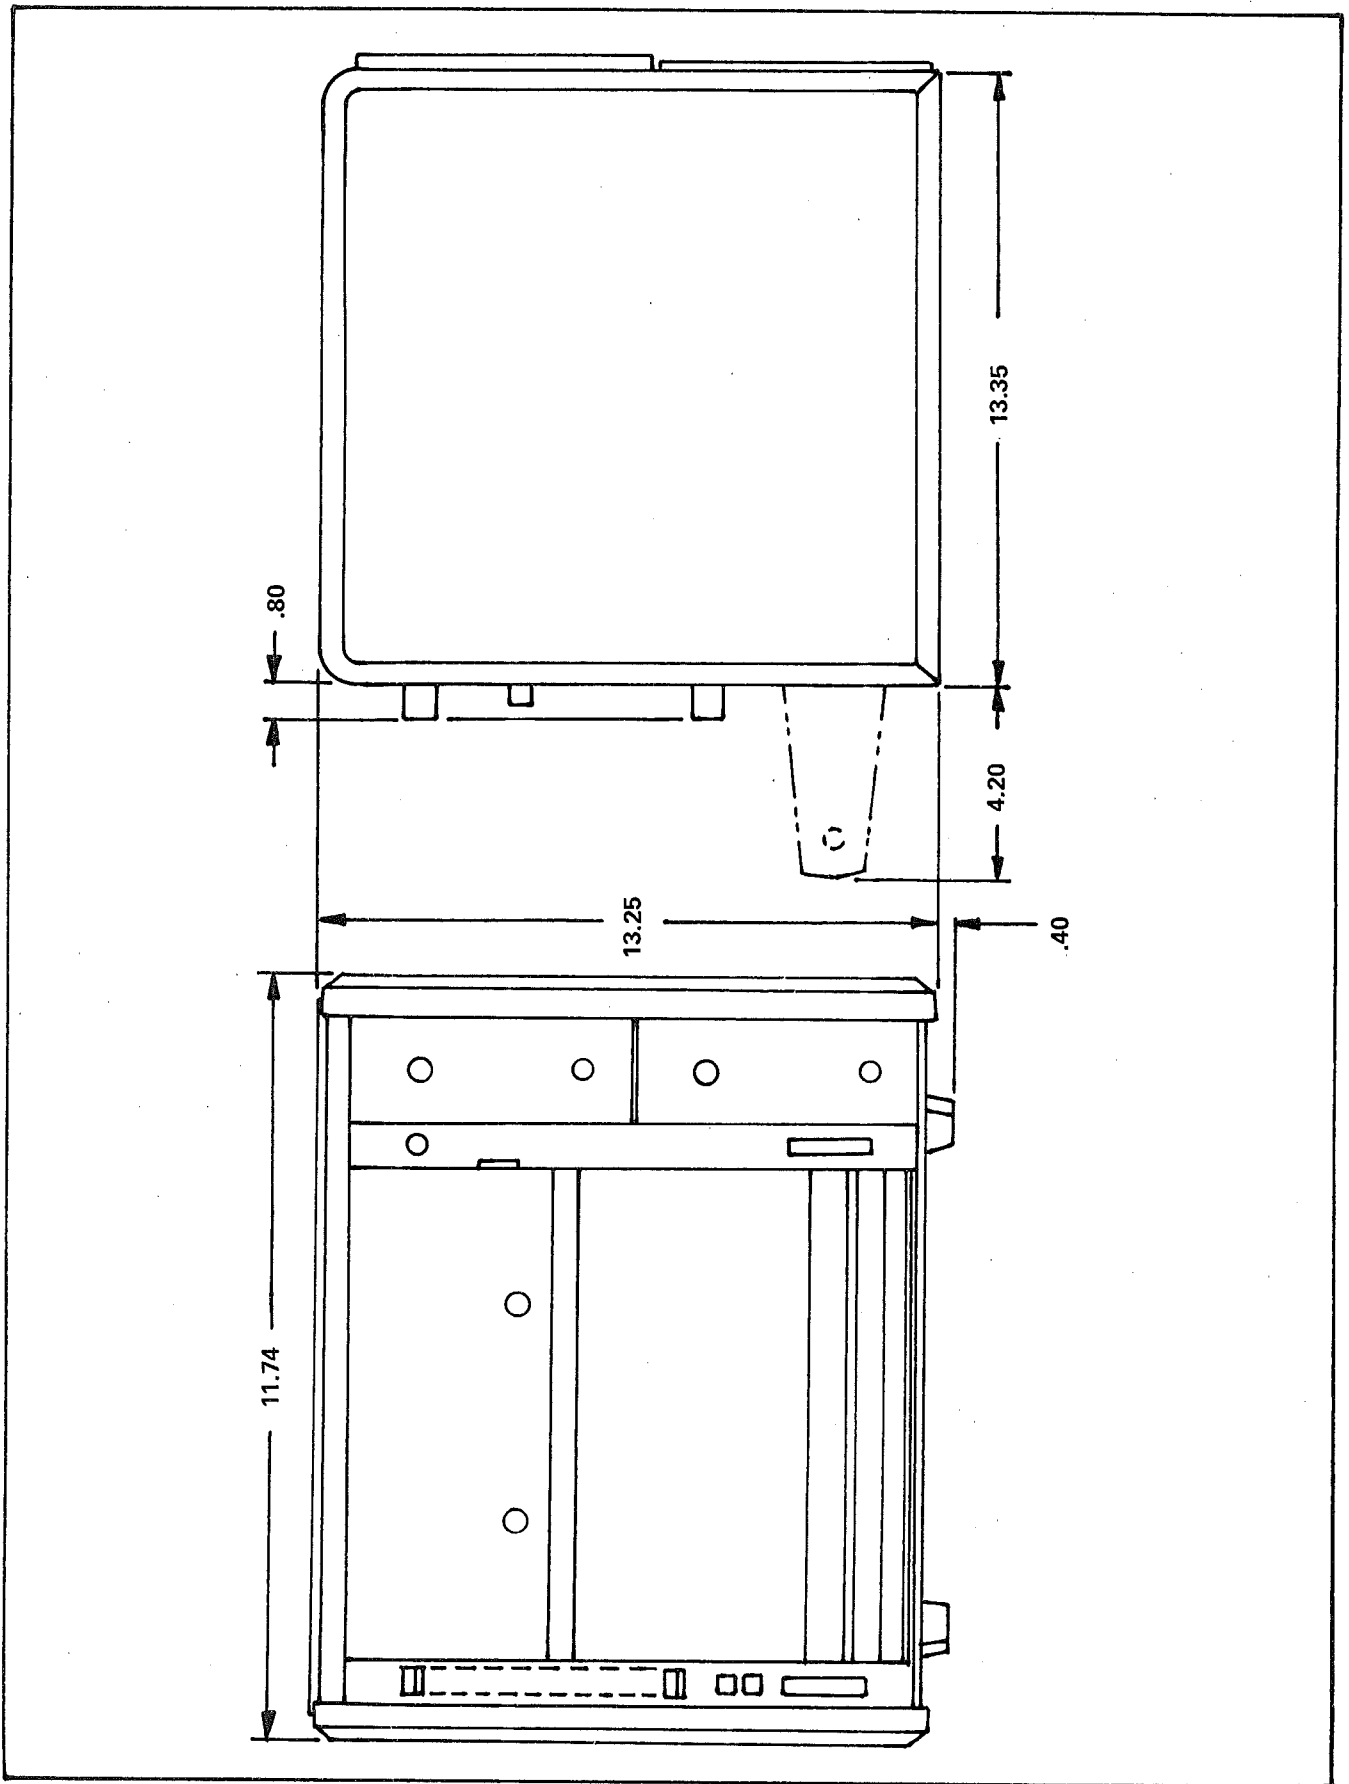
OUTLINE DIMENSIONS - 2200S PORTABLE RECORDER W/ PREAMPS
